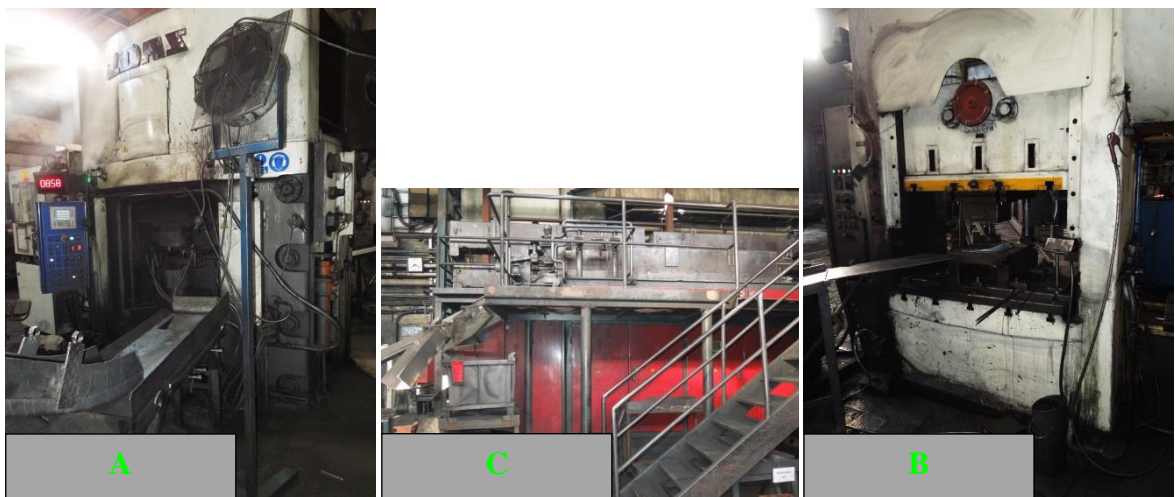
Forging Press (A), Inductor (C) and Trimming Press (B) (own processing)
